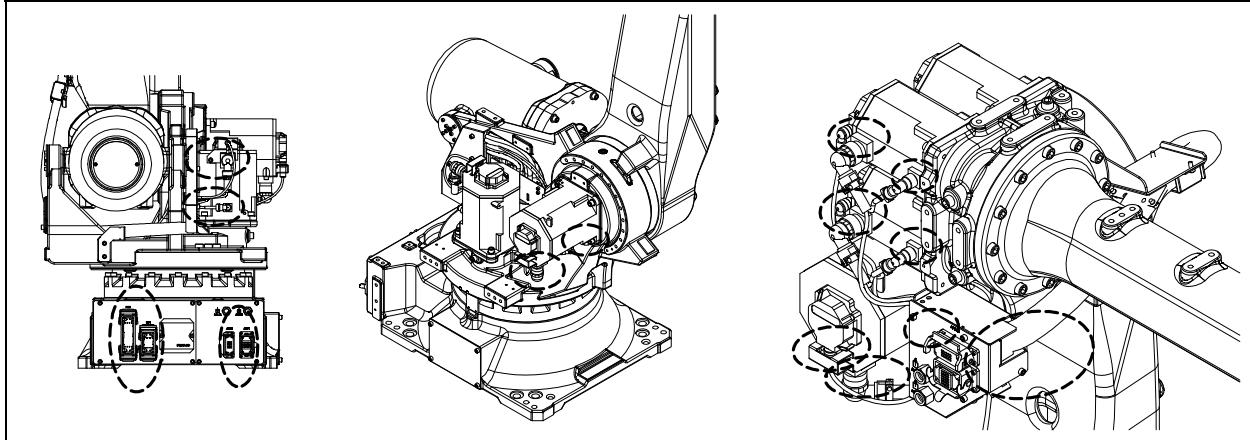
(d) Connector Inspection points (R-2000iC/165F/210F/125L/165R/210R)
